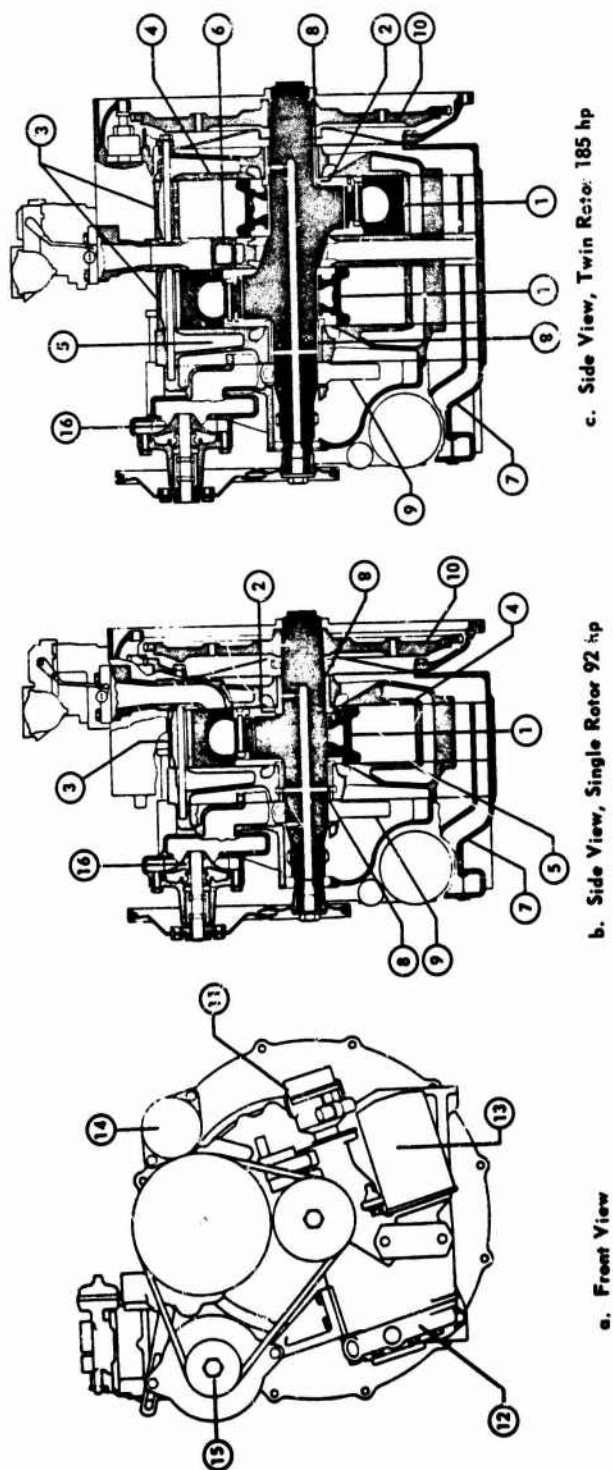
Rotary-Piston Engine Configurations, 1- and 2-Rotor Engines
